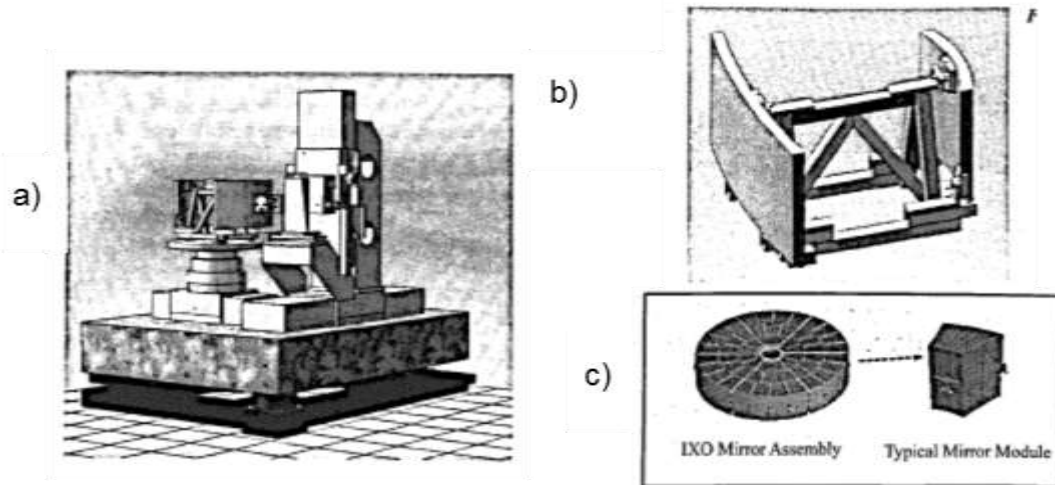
a) The measuring system, b) Measured component – sub assembly of IXO Mirror Assembly, c) Example of the assembly in which those precision modules fit (Thompson, Youden and Hampshire, 2013)
